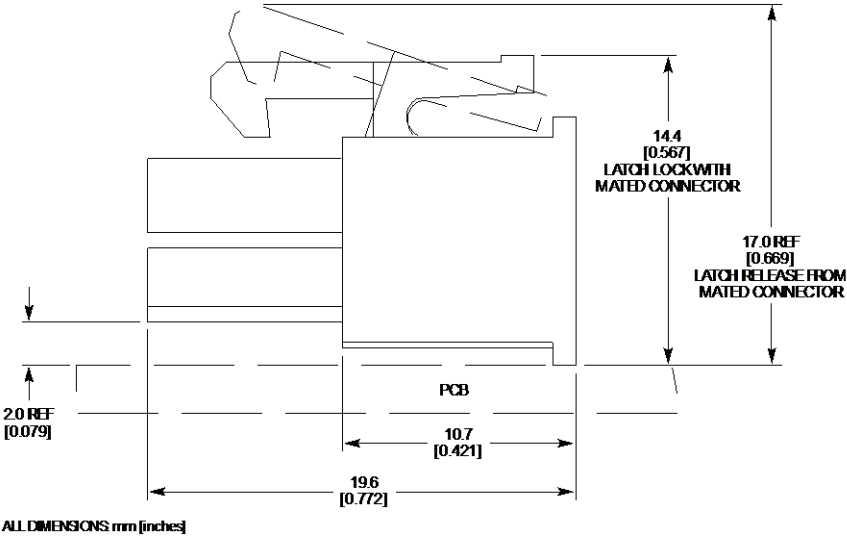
Modular Plug Connector Housing (All Dimensions in mm [Inches])
